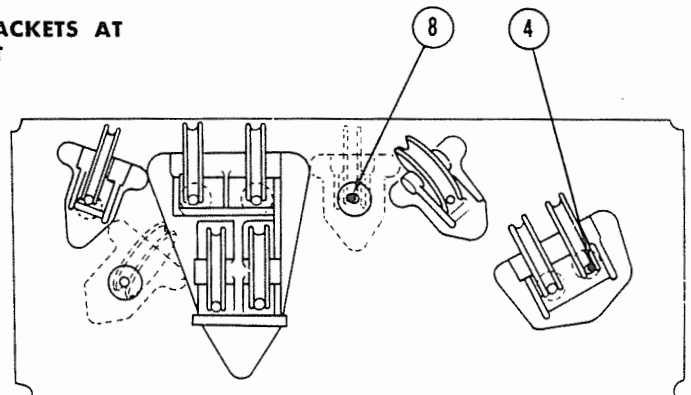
(Sheet 2 of 8 Sheets). Rudder and Rudder Geared Tab Control System – Torque Tube, Geared Tab Mechanism
